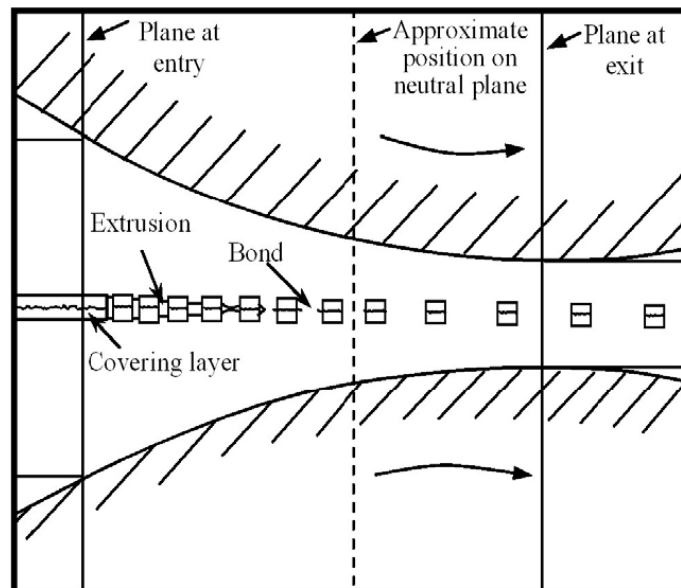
Schematic illustration of fracture and extrusion of surface during cold roll-bonding [13]
